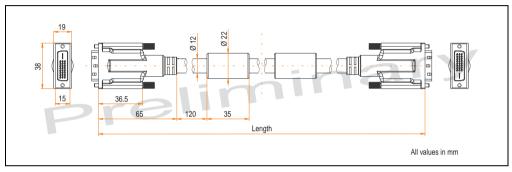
Dimensions - SDL cable 5CASDL.0xxx-03
